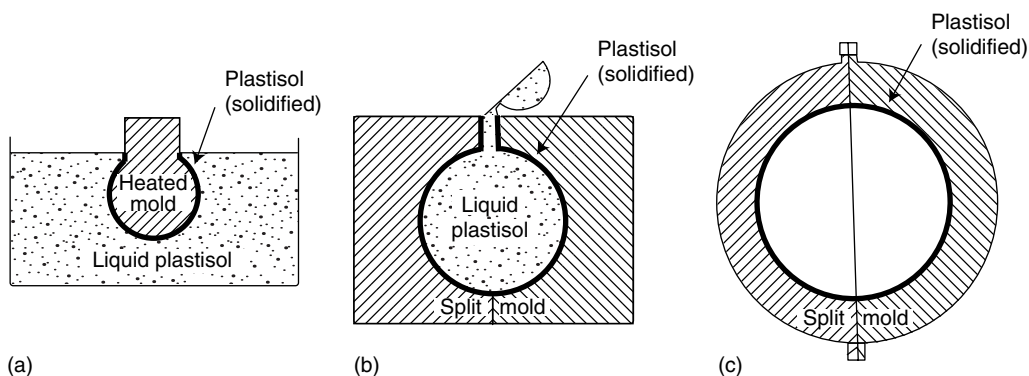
Plastisol casting processes: (a) dip casting; (b) slush casting; (c) rotational casting.
